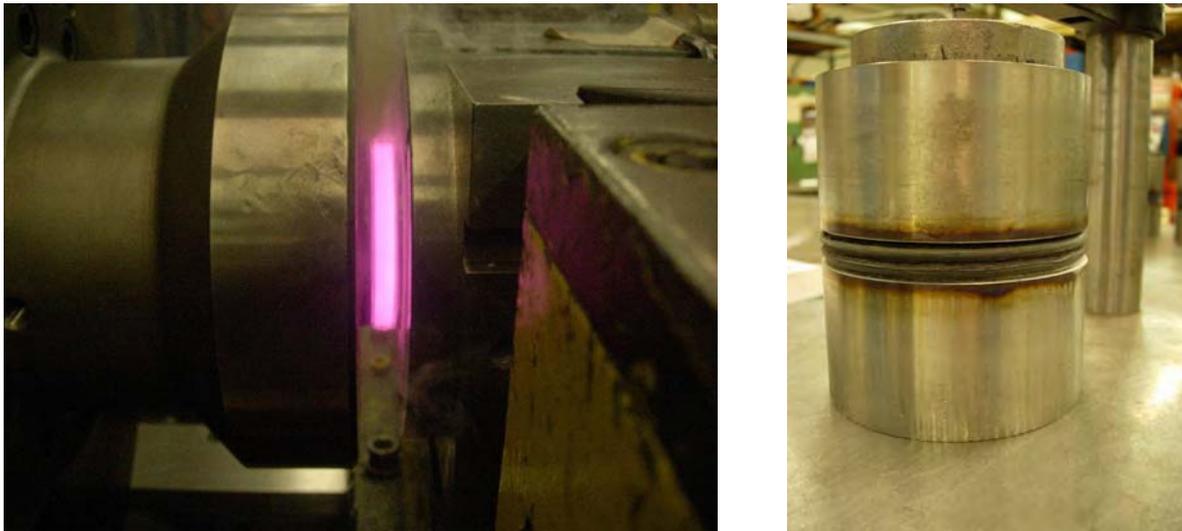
Welding of tubular TZM parts on the inertia welding machine
